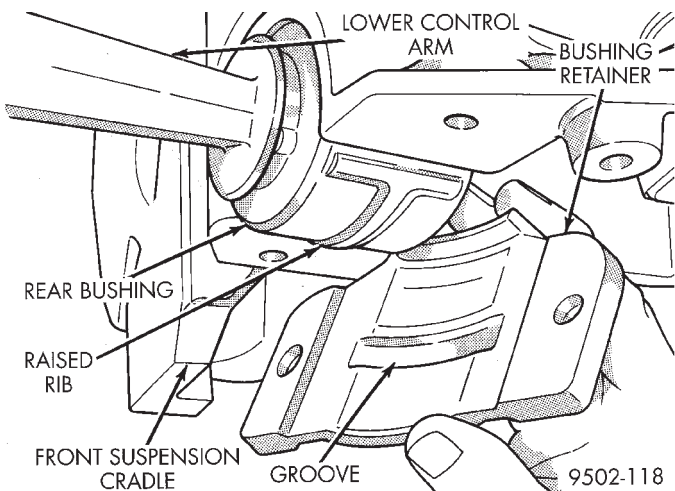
Installing Lower Control Arm Rear Bushing Retainer
